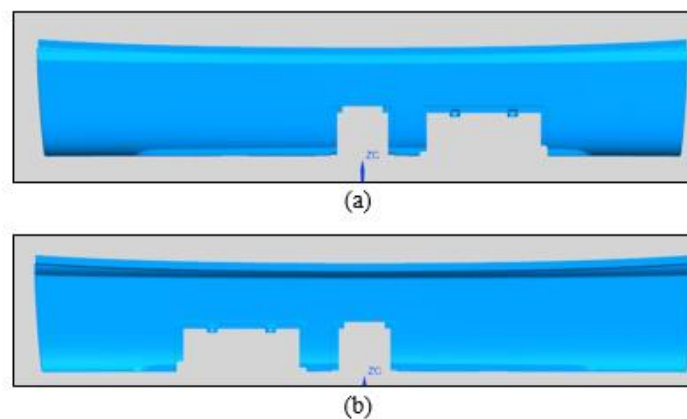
Surface modelling of the rear middle bumper: (a) Rear view. (b) Front view.
